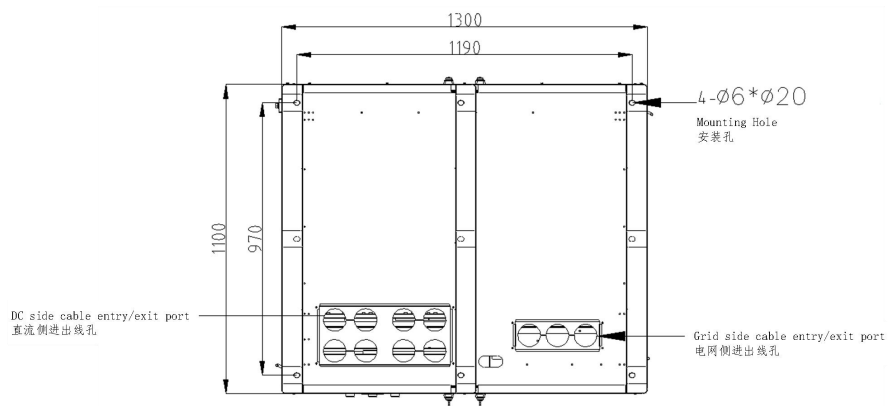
375KW/500KW PCS cabinet mounting holes
